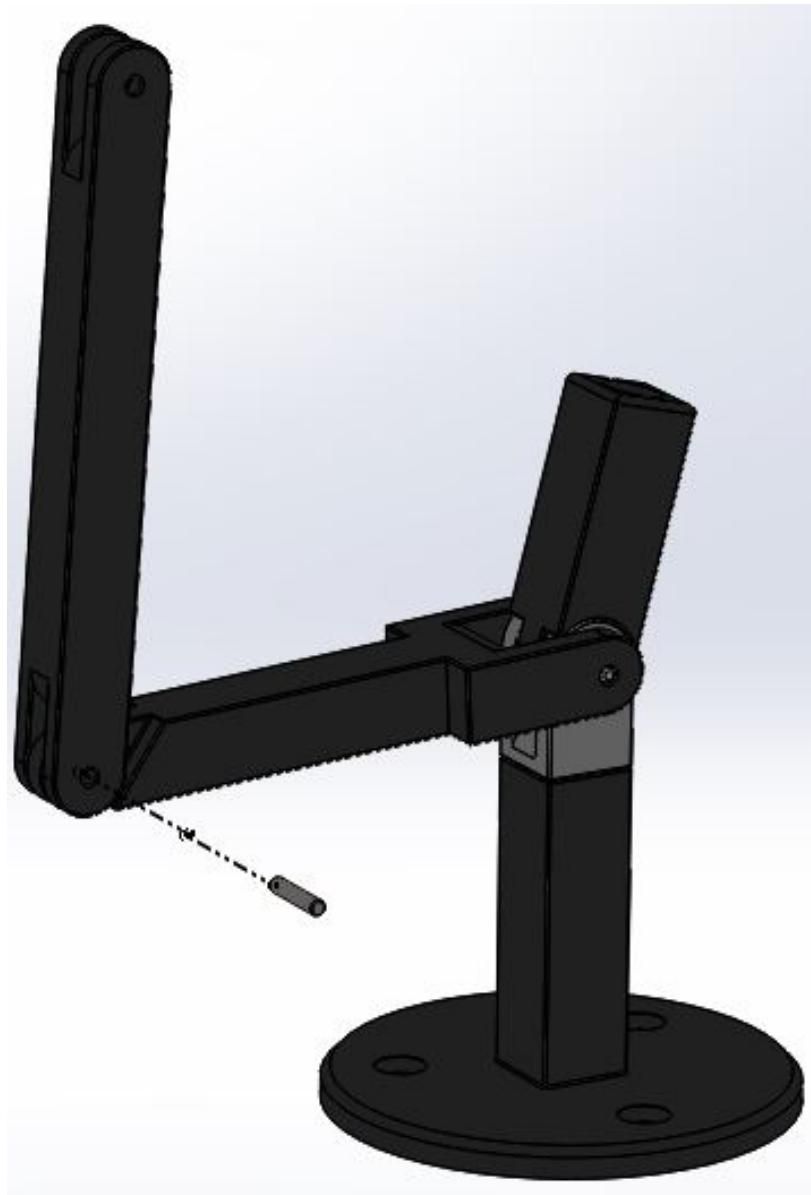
Rodriguez, Juan: Assembly Step 3
